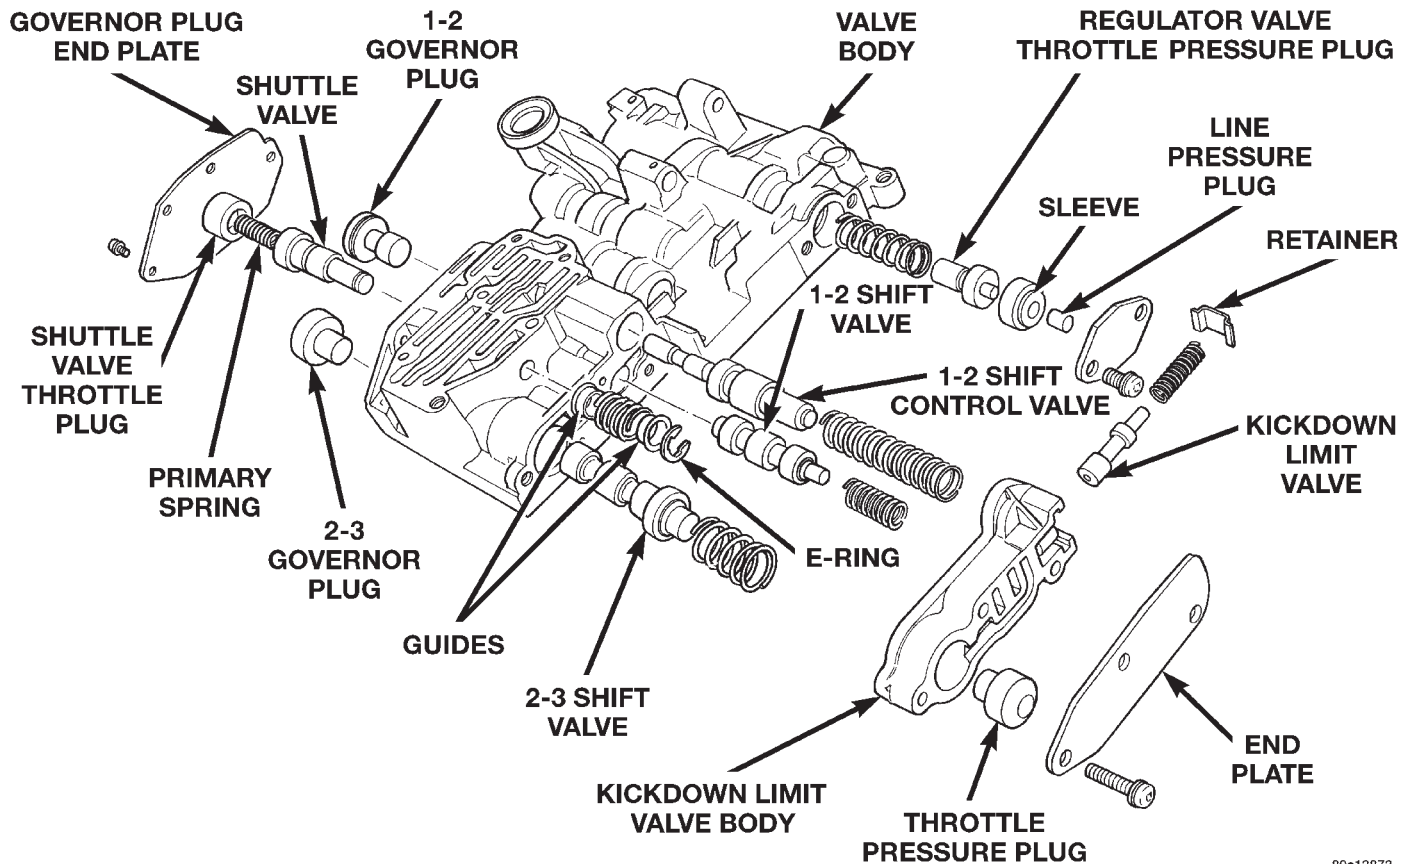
Control Valves, Shift Valves, And Governor Plugs
